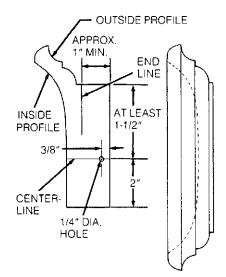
A typical spindle template showing important dimensions and its finished product.
